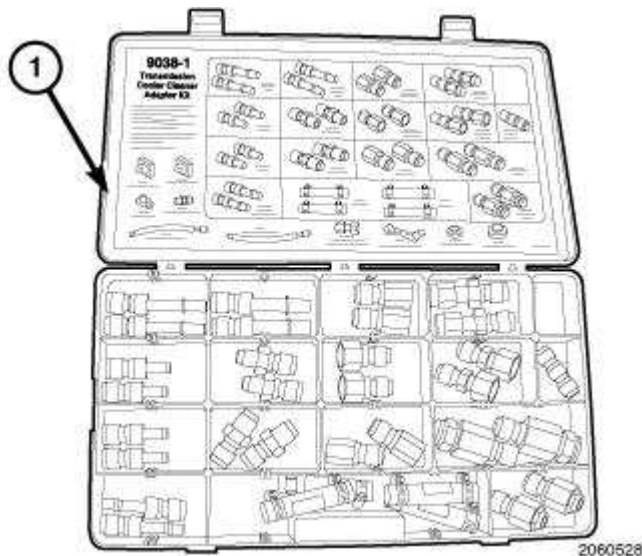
Trans Cooler Cleaner Adapter Kit - 9038-1
